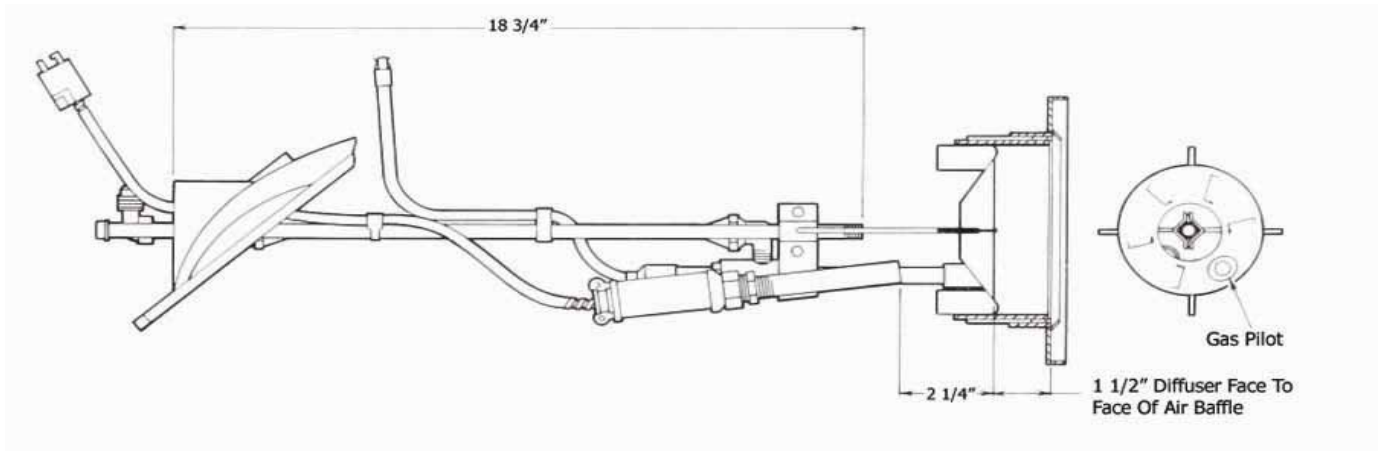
FPG 25, 28, 36, & 42 Drawer Dimensions
